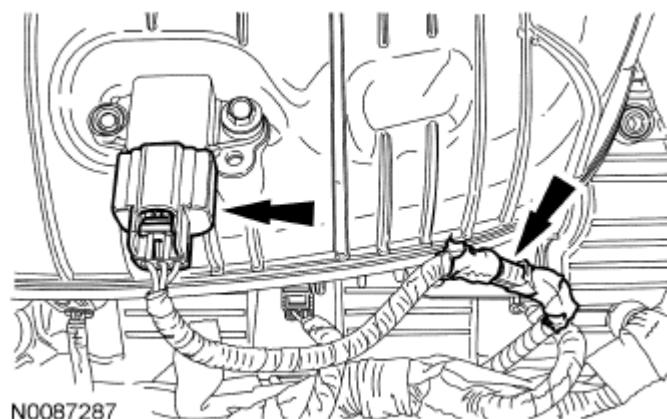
Locating Manifold Absolute Pressure Electrical Connector
